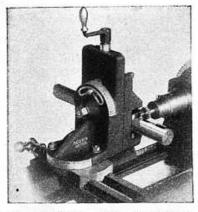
Milling Woodruff Keyseat on a 13-inch Lathe
